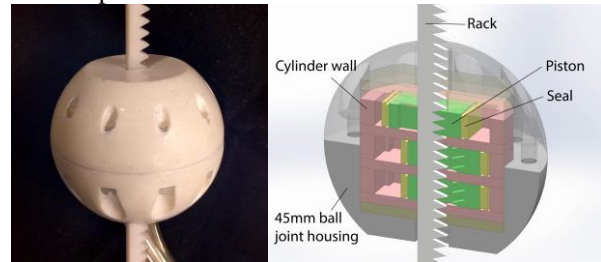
Left: assembled actuator. Right: cutaway view, exposing three pneumatic cylinders with toothed pistons.
